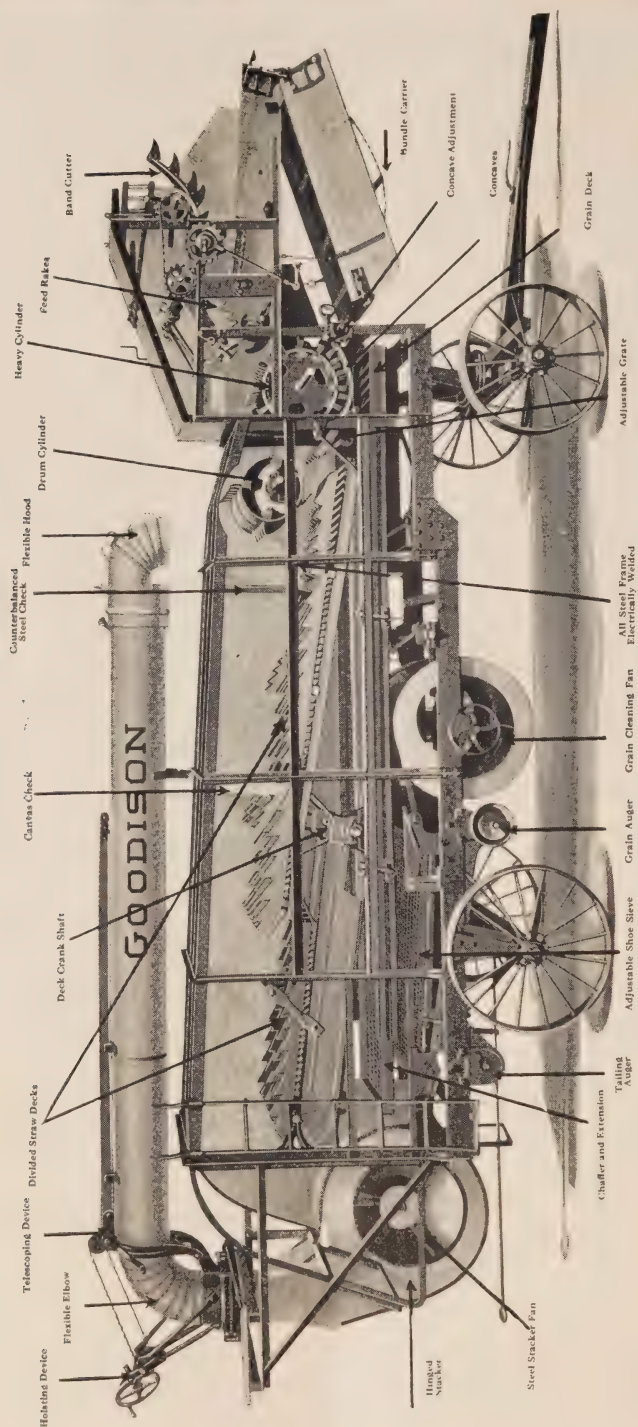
Cross section through threshing machine, which clearly indicates the parts of a modern machine. The arrows and naming of the parts suggests the work of each unit and gives an idea of the process of grain separation as done by present day machines, either individual or those doing customs work. There are of course some differences between the machines of the various manufacturers.
